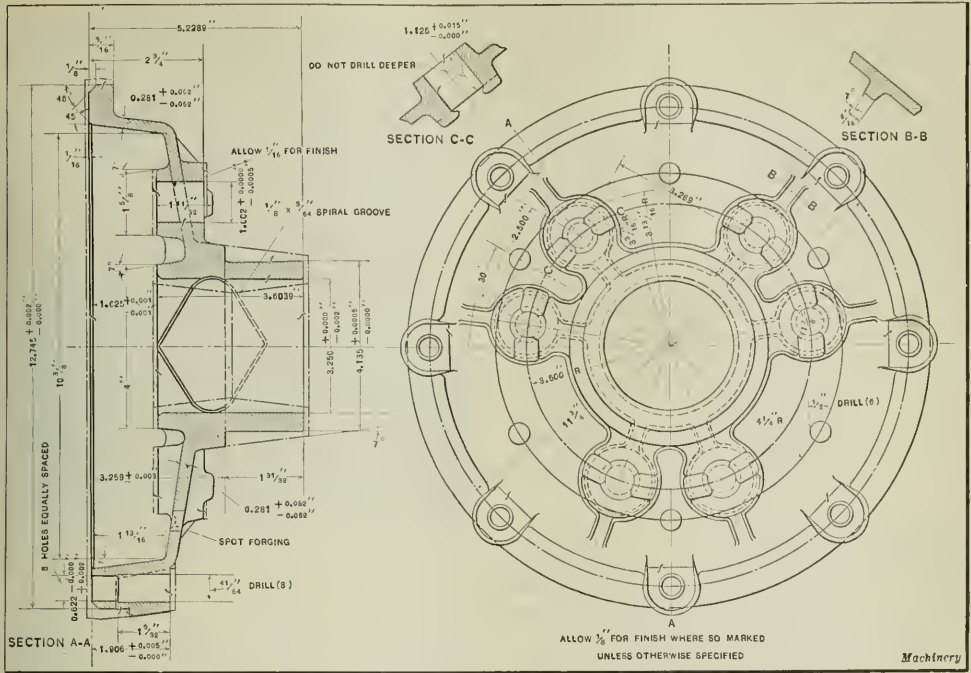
Differential Gear-case for Motor Truck, which is produced by drop-forging
